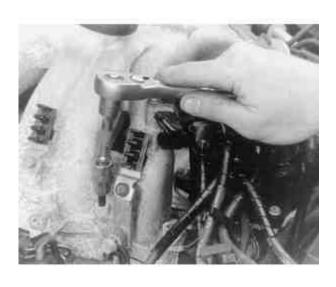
Once the collector is removed, the fuel injector harness connectors are accessible
